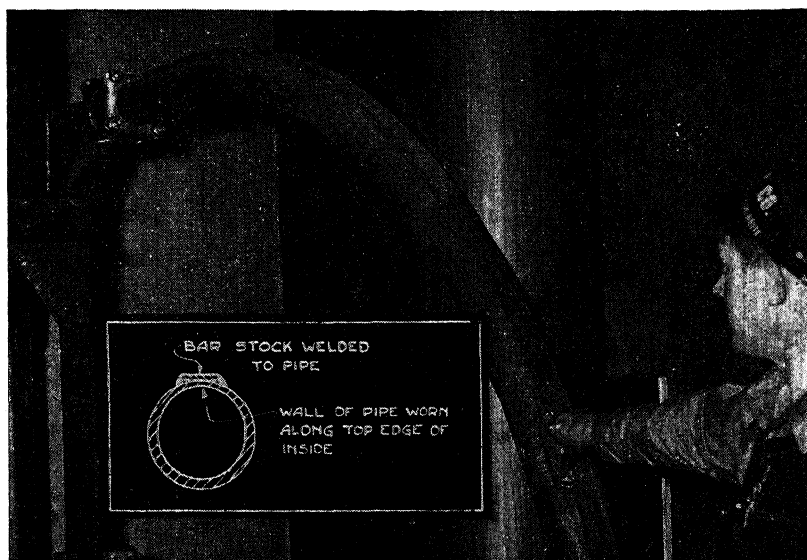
The top wall of this grain pipe, worn thin, was reclaimed by welding a steel bar along the edge as shown.
